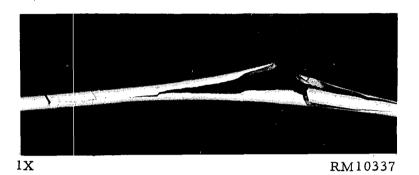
TYPICAL APPEARANCE OF A BARE EXTRUDED SPECIMEN WHICH CRACKED AFTER SWAGING
